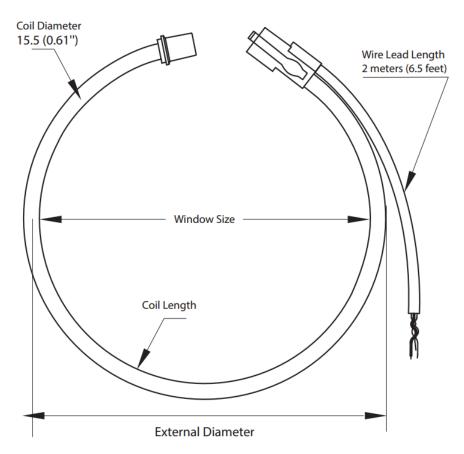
JD-SCT-xxx-xxxx dimensions
